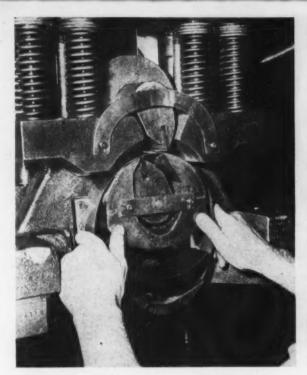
Welding flash sheared from weld by rocking blades in die after shoe at bottom pulls ring taut. Die used in P2 Bliss press.
